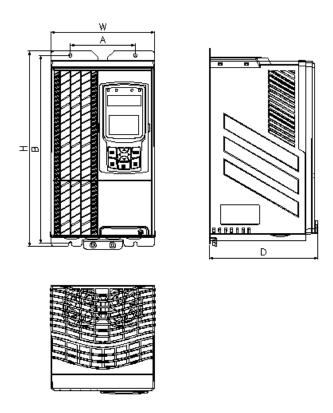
Installation dimensions of AS450 4T01P1~4T05P5
